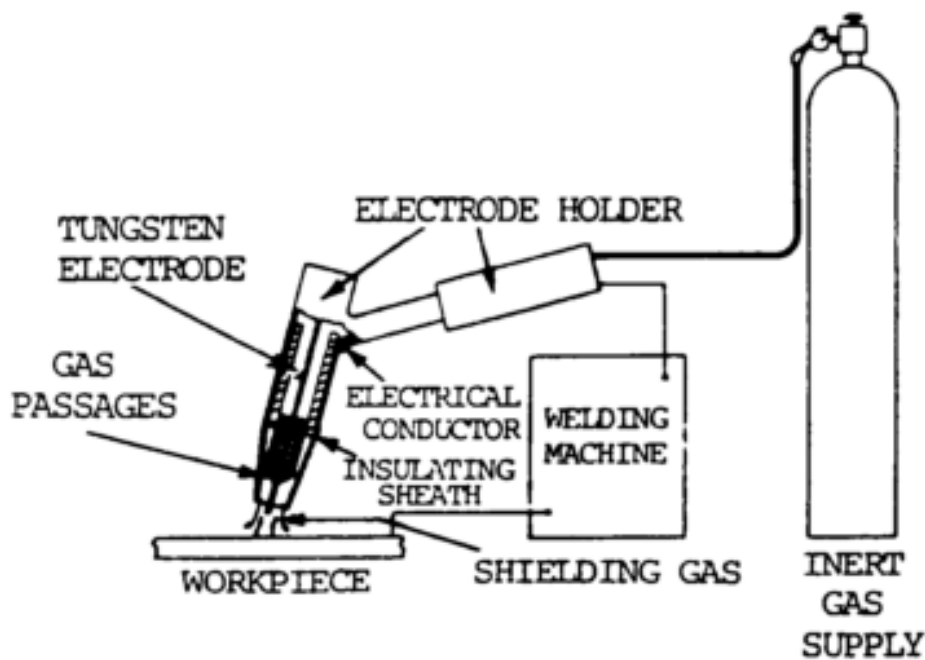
Gas tungsten arc (TIG) welding (GTAW).
